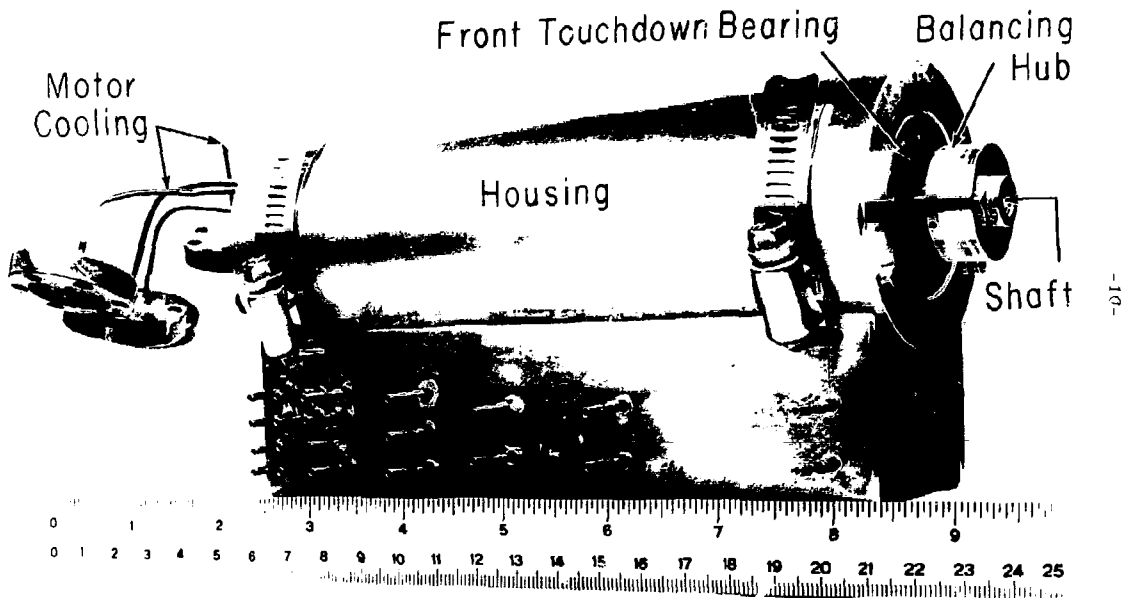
Chopper Drive. The cylindrical aluminum housing contains the motor and magnetic bearing. Low friction front and rear touchdown bearings made from graphite impregnated polymer contact the rotating shaft in case of magnetic bearing failure.
